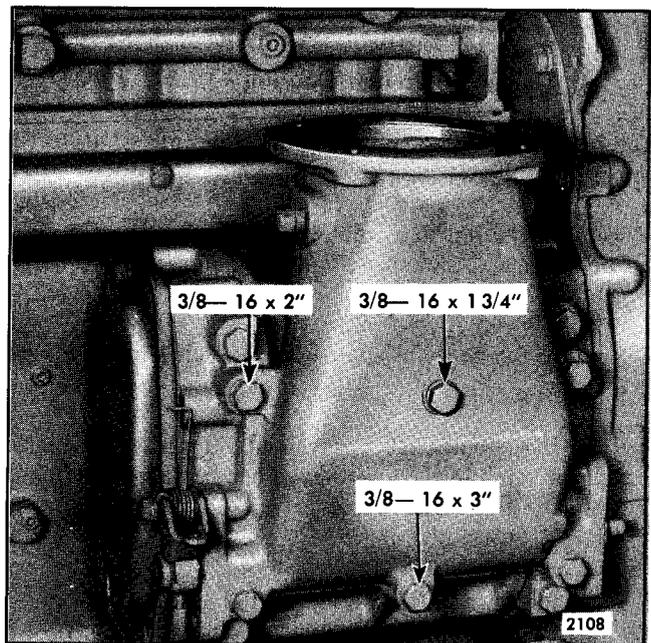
Location of Air Shutdown Housing Mounting Bolts (In-Line Engines)
